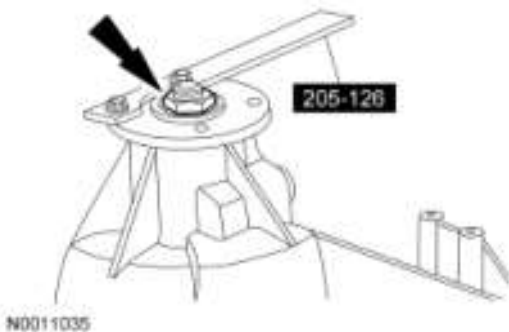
Locating Output Flange Nut And Special Tool (205-126)
